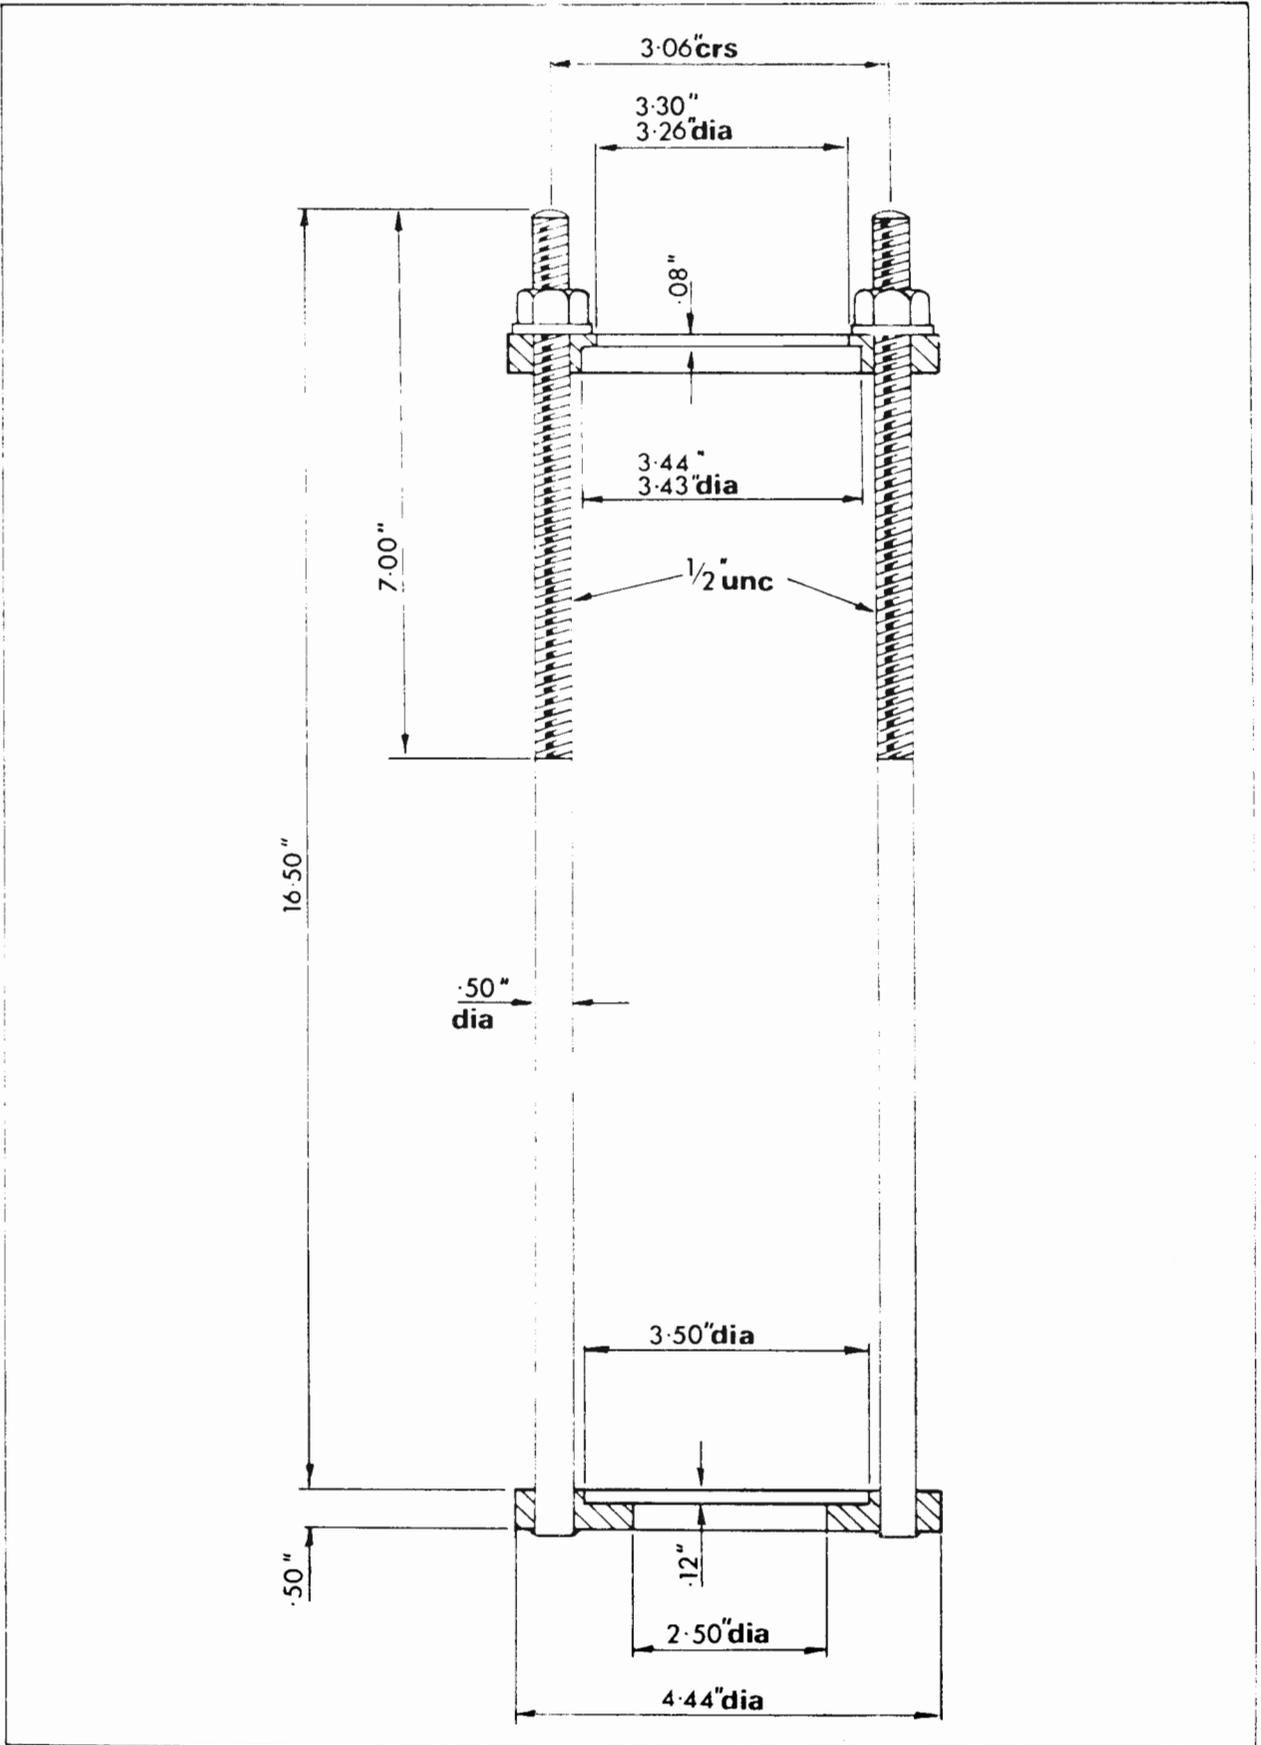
TOOL FOR REMOVING ROAD SPRING FROM DAMPER
